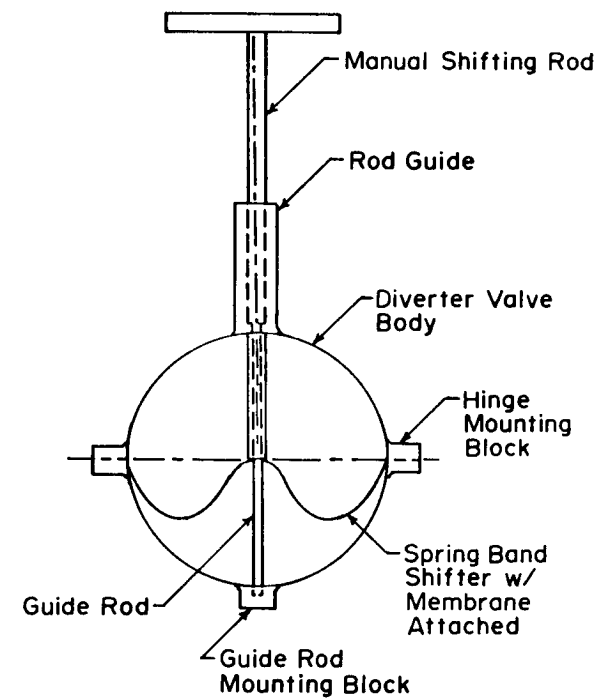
Cross section diagram of a style 1 diverter valve with a stainless steel, spring-band, shifter.
